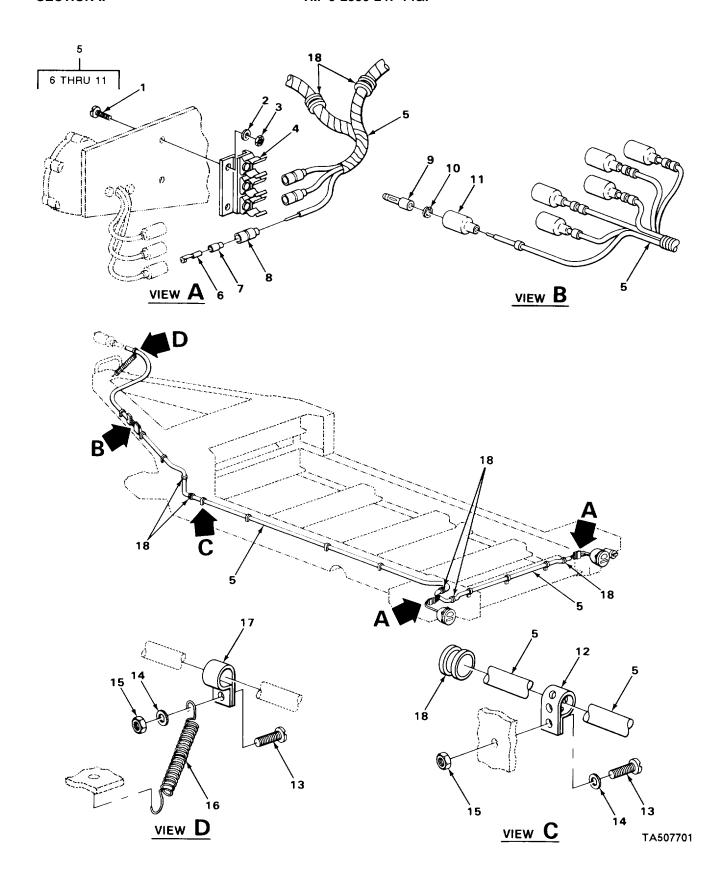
CHASSIS WIRING HARNESS (EARLY MODELS).
